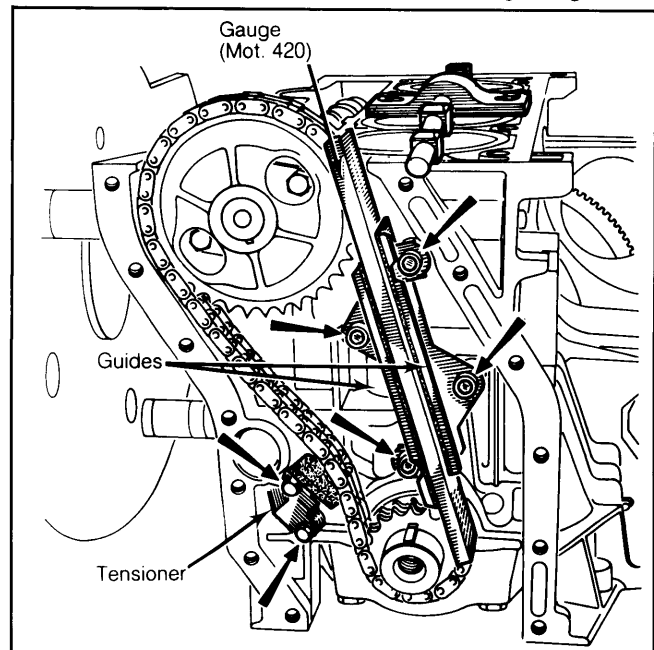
Alignment of Camshaft and Crankshaft Sprockets
